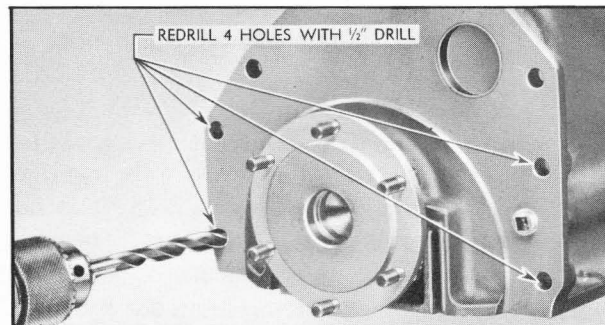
Enlarging Bolt Holes in Crankcase Flange
